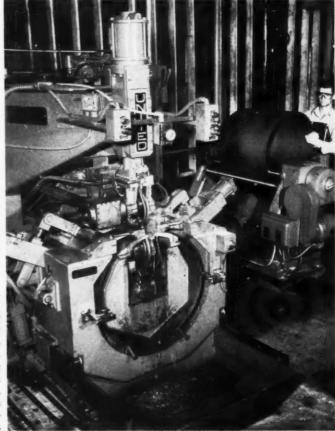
(Upper left) All small stampings on table at left are spot welded to the exterior of the tank after being set into holding fixtures and advanced to welding position. Individual guns are fired in sequence to make the welds. FIG. 5 — (Upper right) Applying an end-locking fixture that helps position a large stamping around the sump. This stamping, and others placed in side heads, are spot welded to the tank after the three heads are advancd radially.
